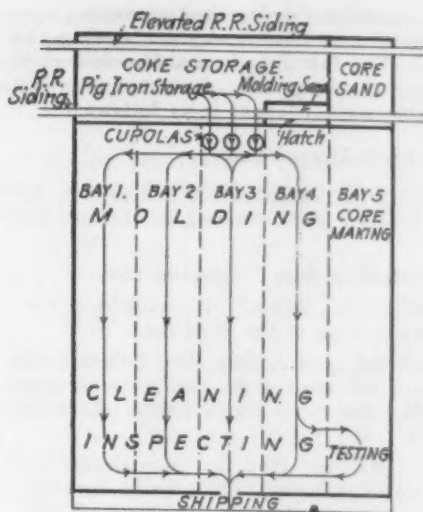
(Above) Layout of a Jobbing Foundry Employing 90 Men
